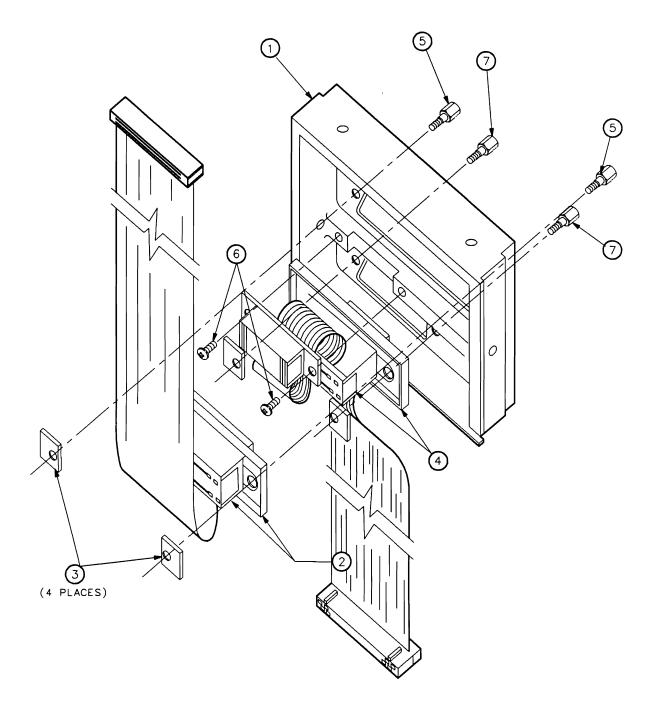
Interconnect Cable Assembly Parts Identification (1 of 2)
